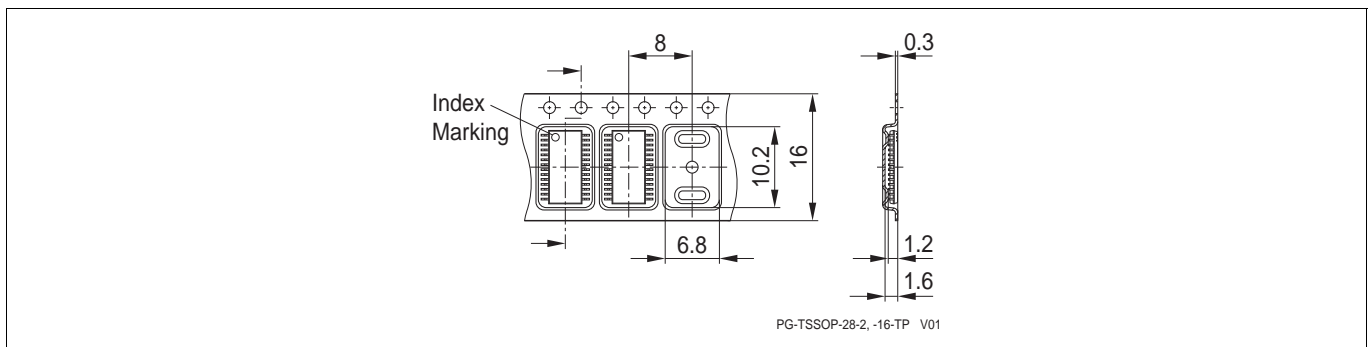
Tape & Reel Dimensions PG-TSSOP-28-2
